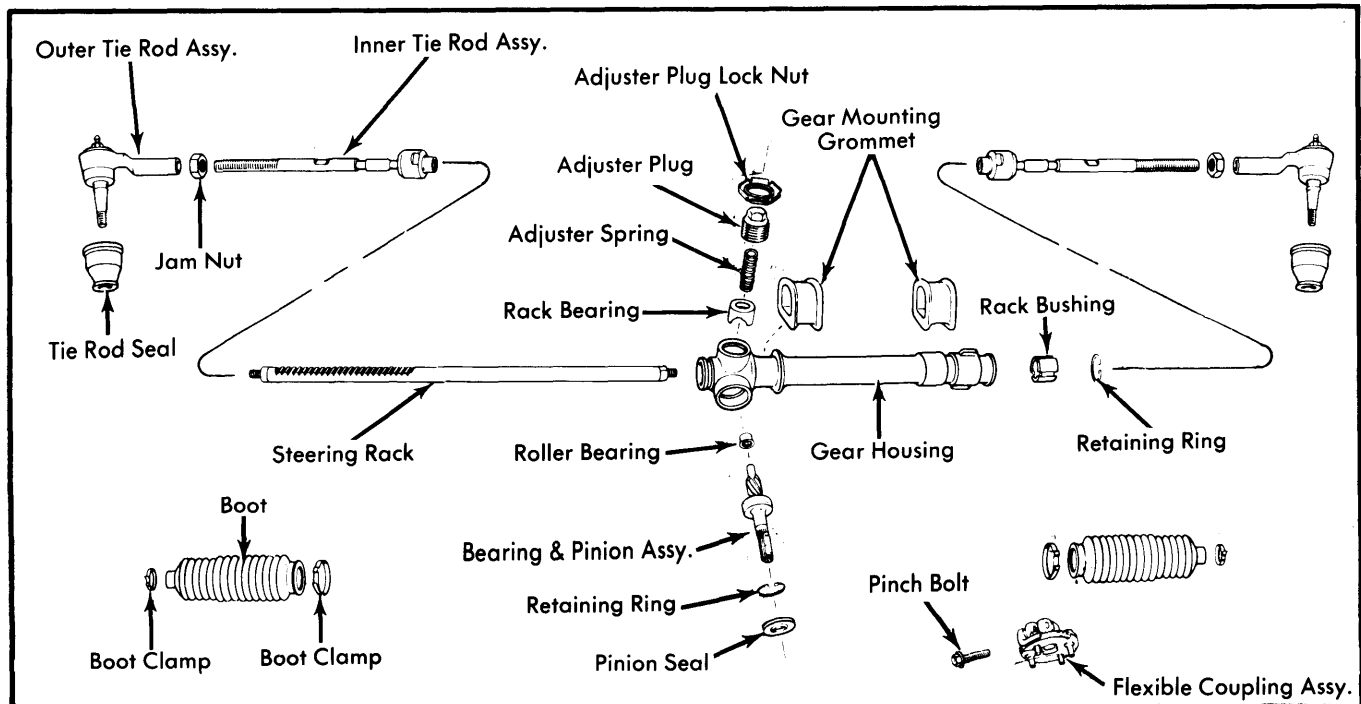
Steering Gear and Linkage Assembly (Chevette Shown, Others Similar)
